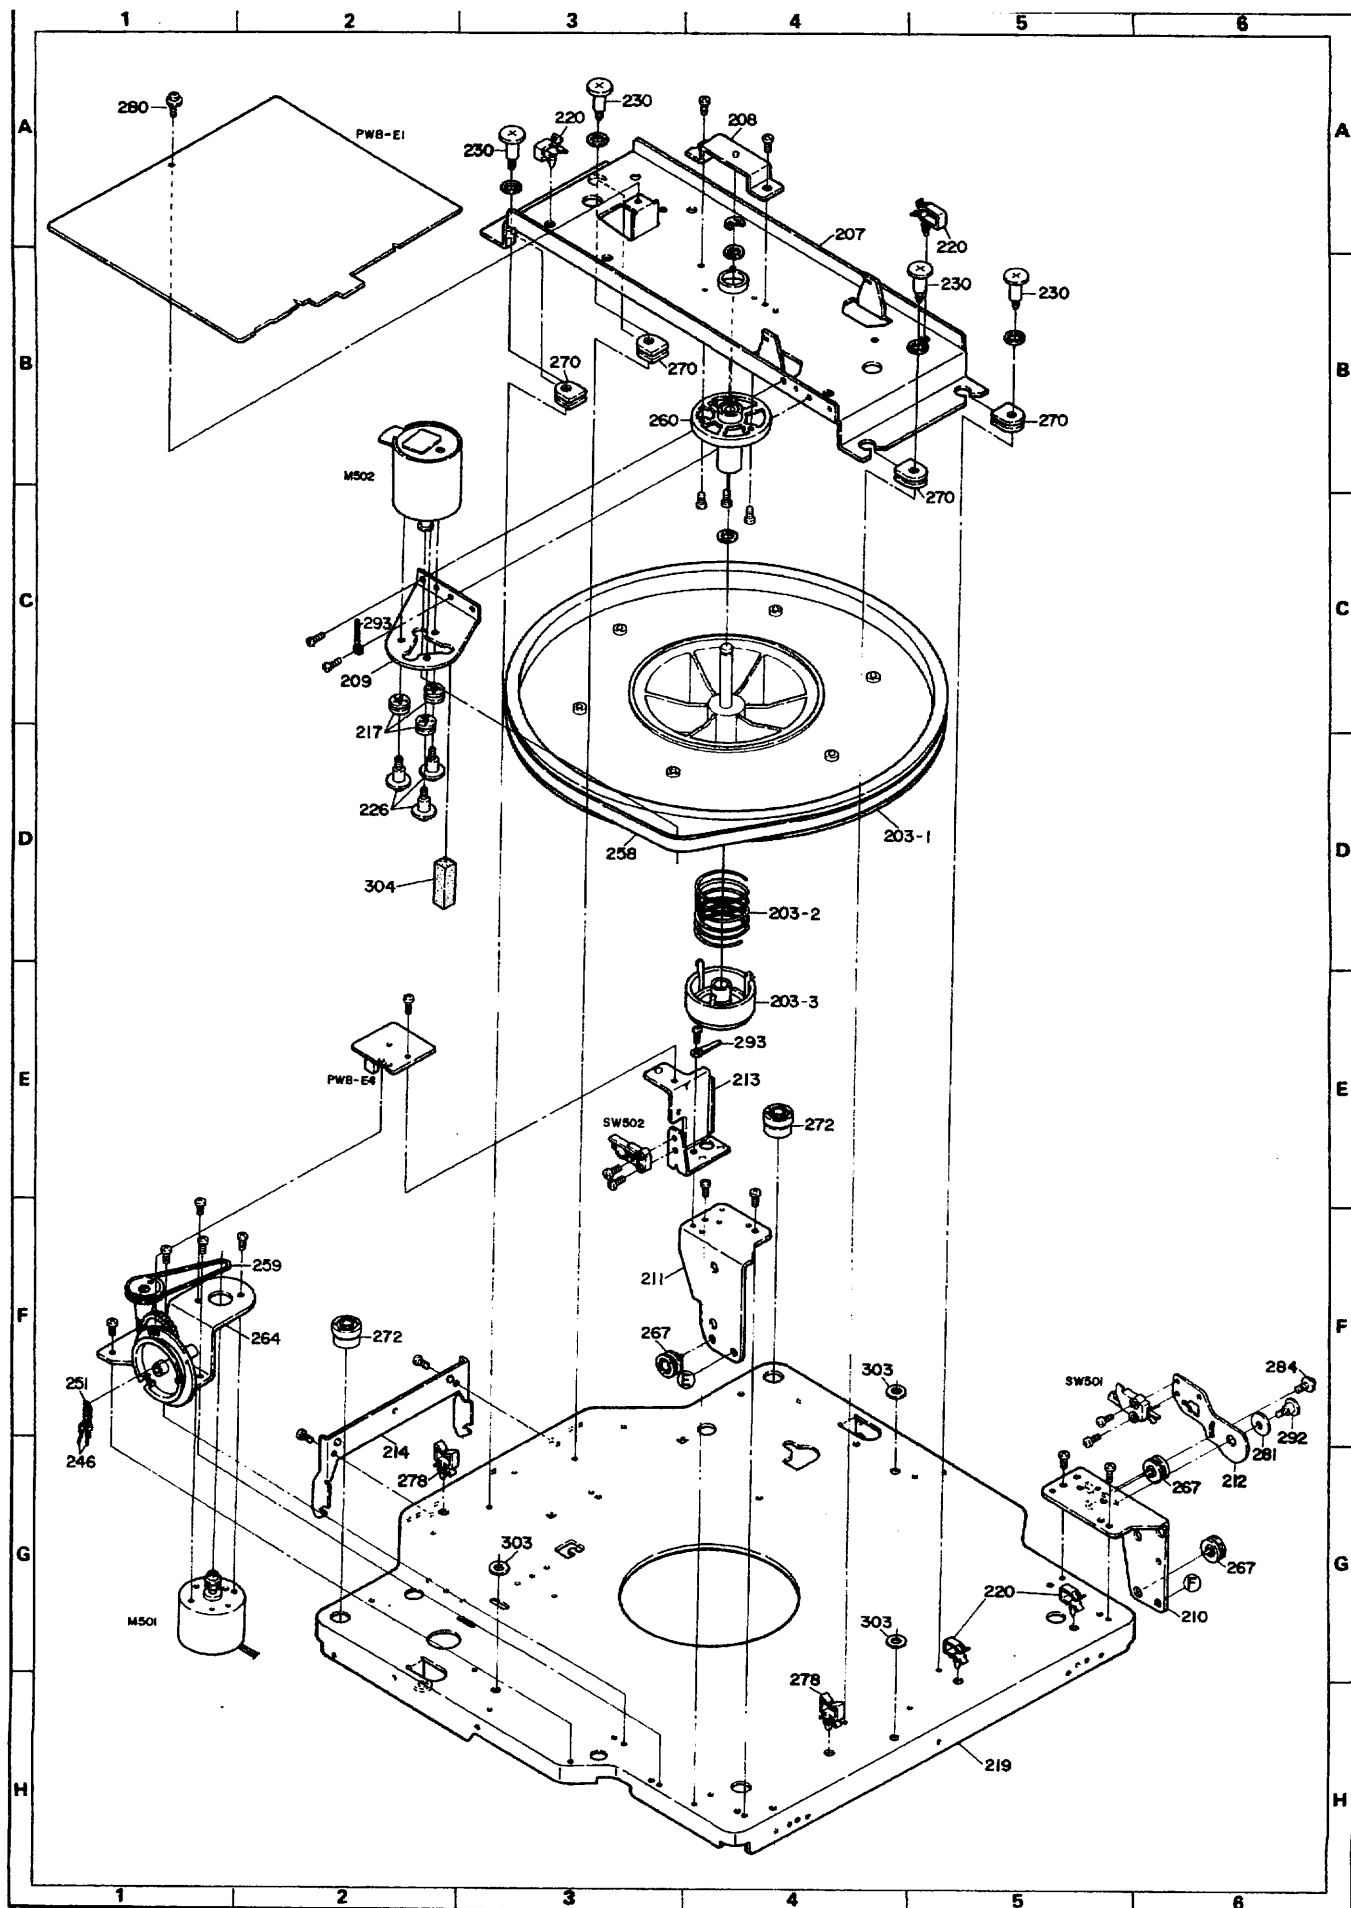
PLAYER MECHANISM EXPLODED BOTTOM VIEW
